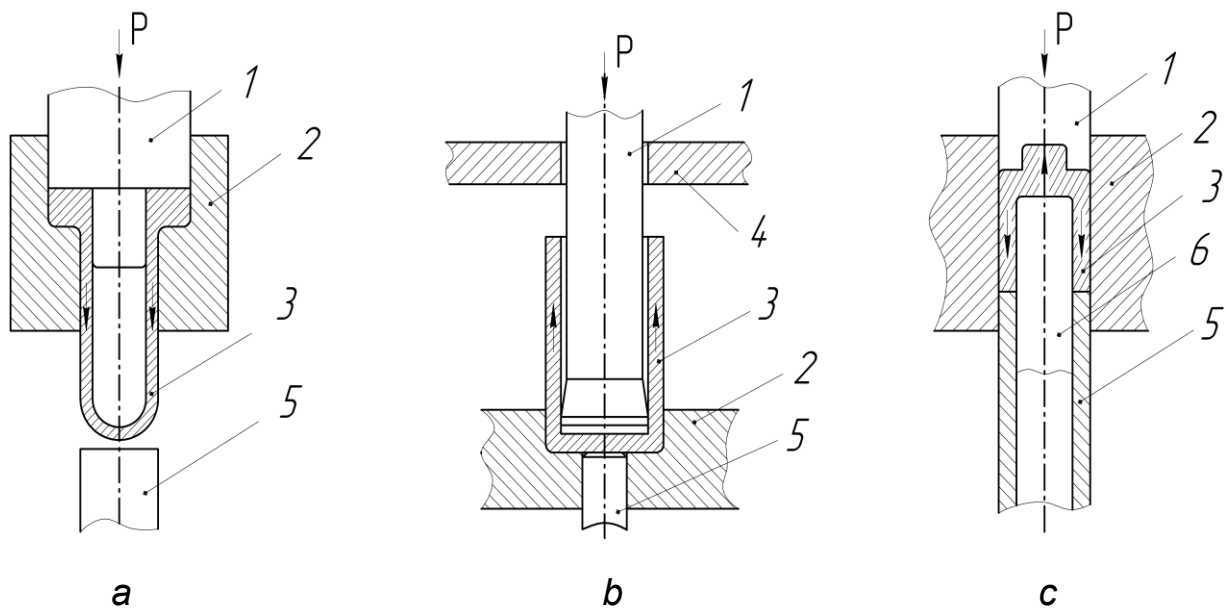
Types of a cold extrusion: a – direct, b – indirect (impact), c – combined (1 – punch; 2 – die; 3 – extruded product; 4 – stripper; 5 – kick-out; 6 – lower punch)
